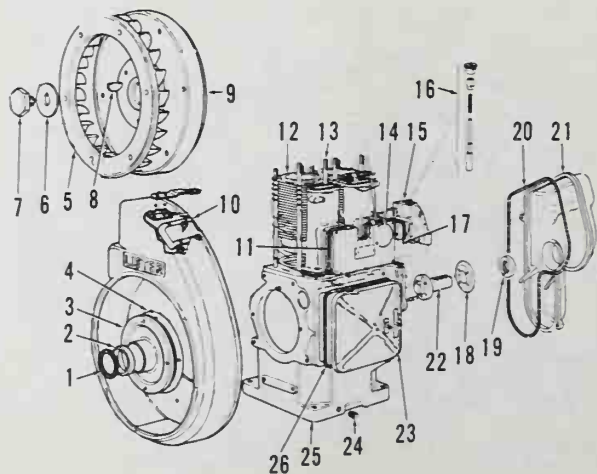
To service camshaft, remove fuel pumps, fuel pump tappets, tappet guide locating pins and guides.
